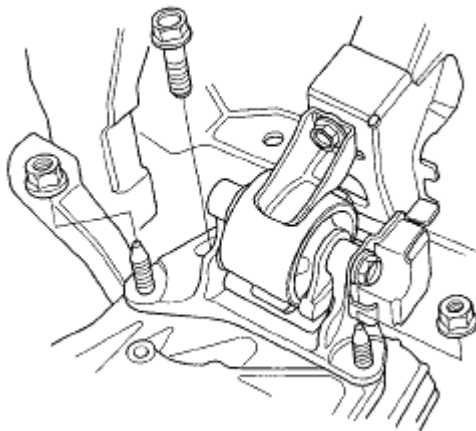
Identifying Transmission Mount Bracket Support Bolt And Nuts
